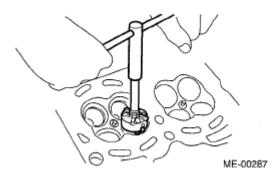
Inspecting Intake And Exhaust Valve Seats Courtesy of SUBARU OF AMERICA, INC.
